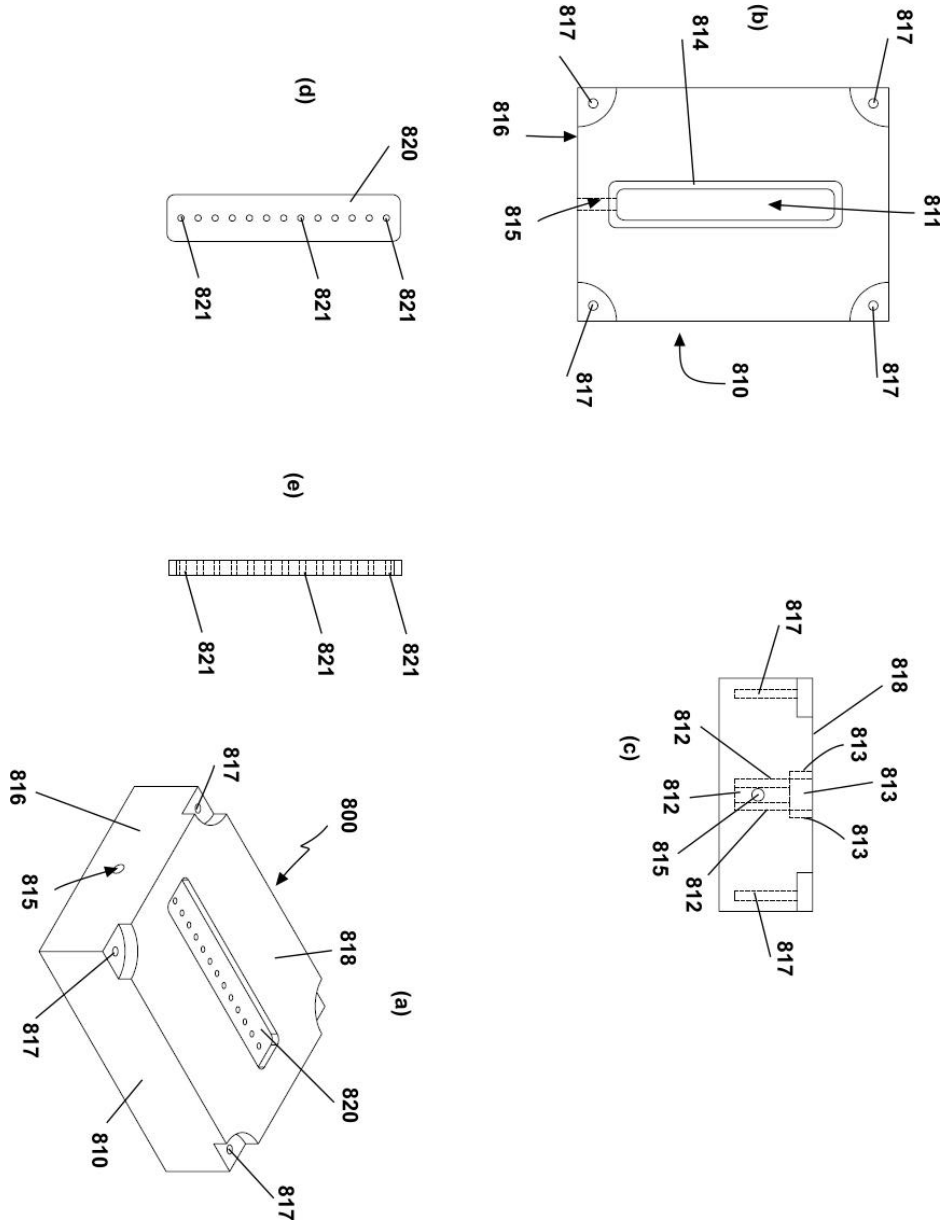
Perspective view (a) of the lower diffuser, a top plan view and front view of a first component of the lower diffuser (respectively b and c), a top plan view and front view of the second component of the lower diffuser (respectively d and e)
